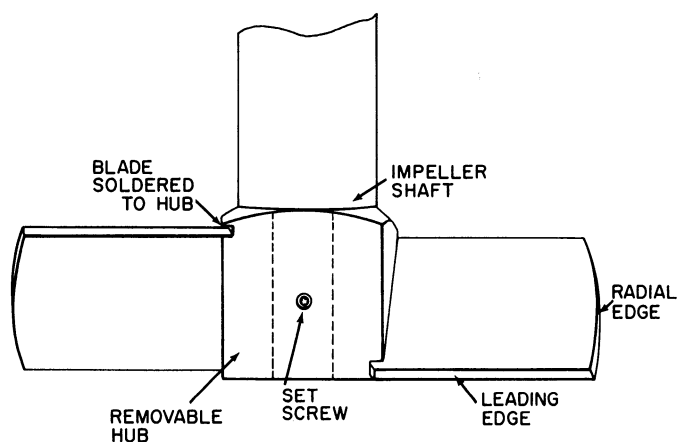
Diagram of removable blade assembly attached to impeller shaft by two set screws.
